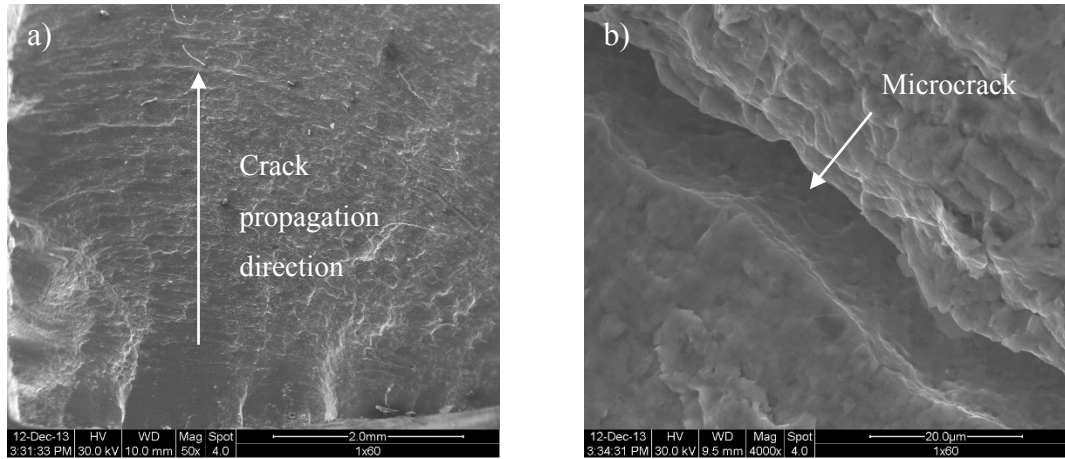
Fracture surface of smooth plane specimens of X60 piping steel, tested under ULCF domain (X60_U0_SP_05, $\Delta\epsilon=7\%$): a) path of macroscopic crack propagation; b) microcrack existent in the fracture surface.
